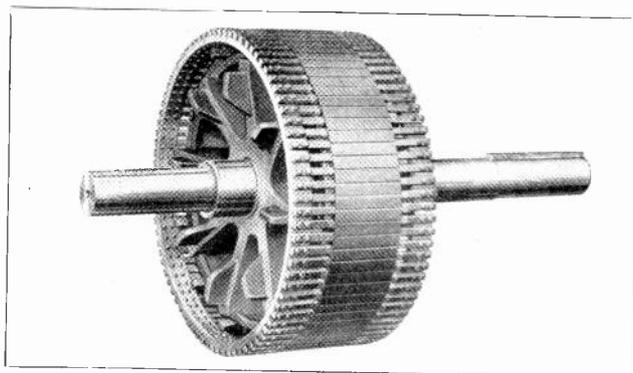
A. This photo shows an excellent view of a squirrel-cage rotor using square bars which are riveted to heavy end rings.
